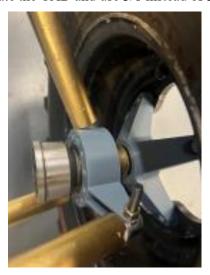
Issue where the holes on hub do not line up to wheel holes. Also, the camber link's rod end is were too big for the knuckle.
